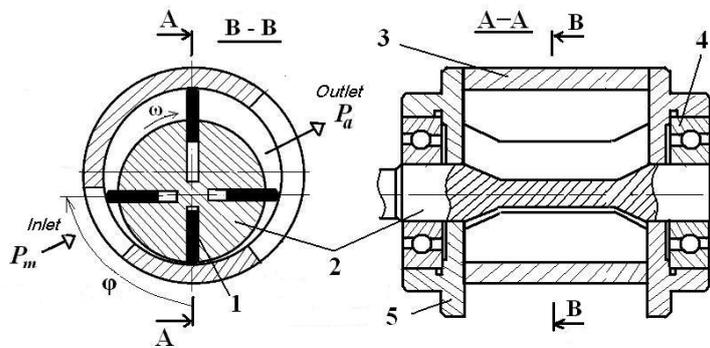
Design scheme of PM model RP42-55.1 — plate, 2 — rotor, 3 — stator, 4 — bearings, 5 — covers
